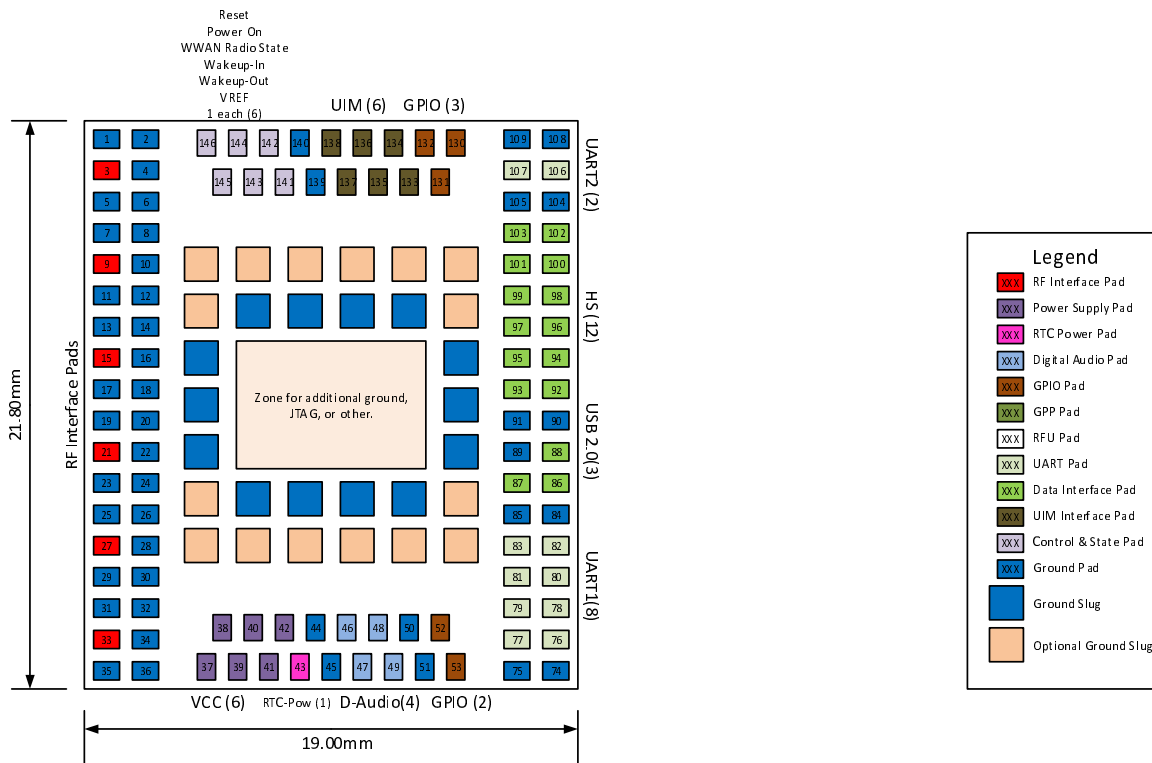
SMT1922 physical form factor (414 mm<sup>2</sup>), dimensions, pad numbering and placement
